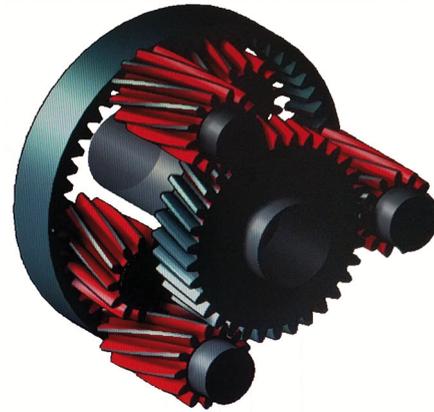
Double pinion epicyclic gearbox for the dual-speed approach.
